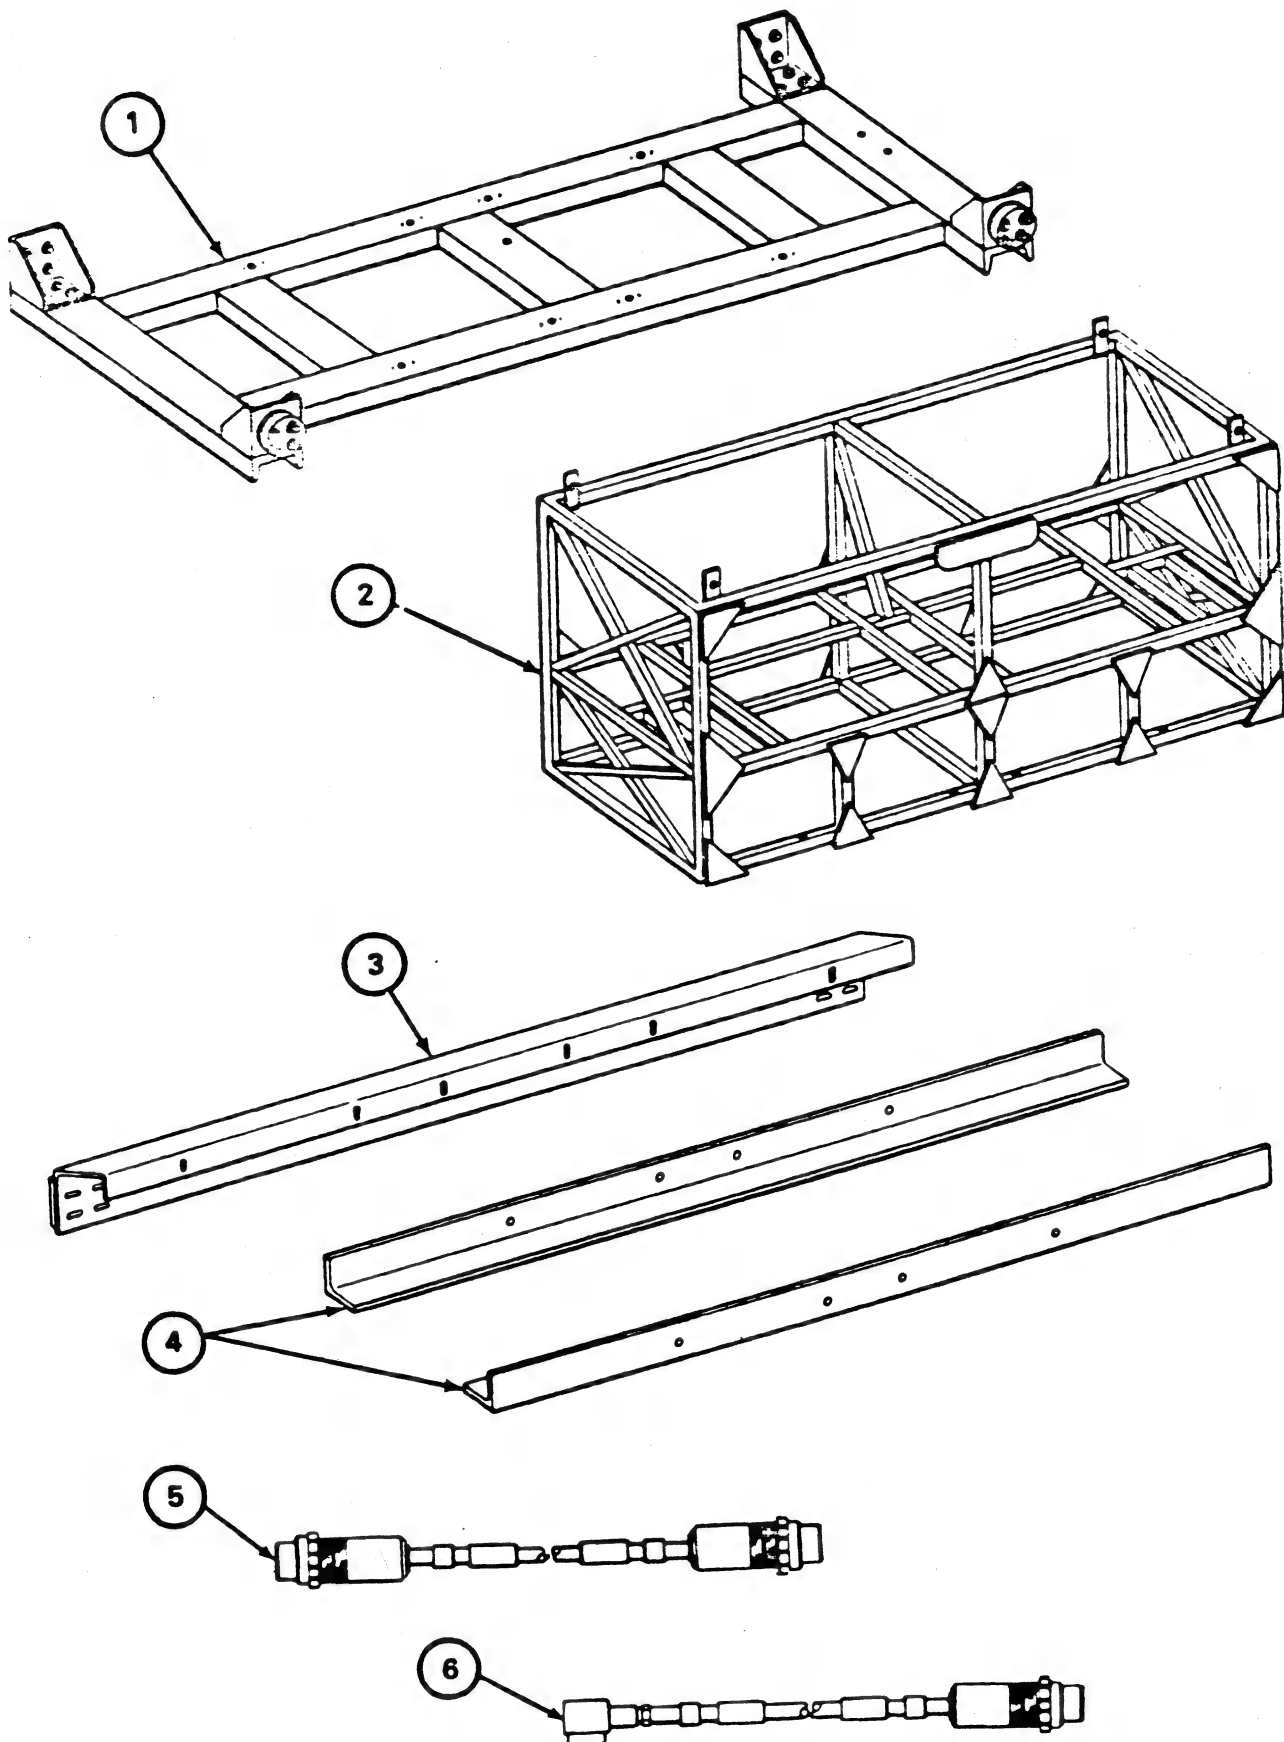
Mounting Kit Assembly M561, MK-1831/GYK-29.
